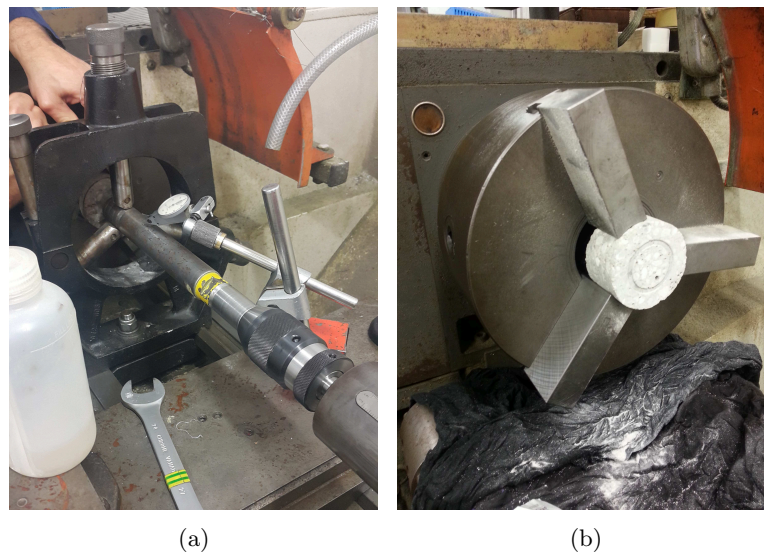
(a) Concrete lathe used to make the notches in concrete samples (b) zoom on the sample
